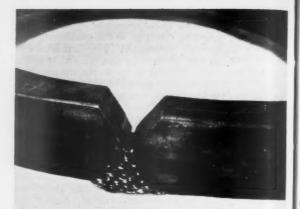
Partially welded RC-A70 bar; 30-in. diameter, 2 in. by $3^{1}/_{2}$ -in. section. Joint preparation is shown
